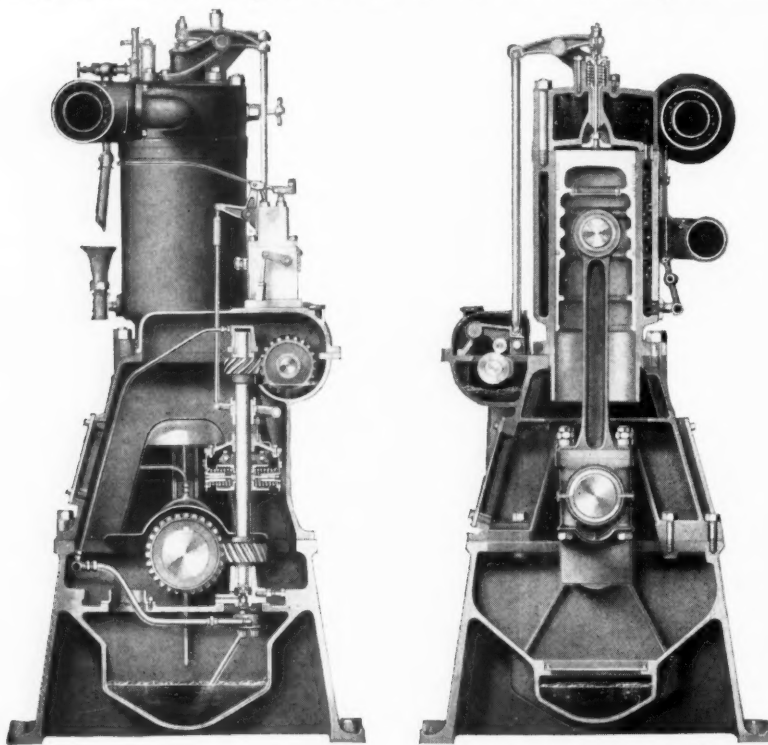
Sectional views of a Chicago Pneumatic MWM Benz Diesel engine, showing lubricating oil pump as well as valve operating mechanism.
